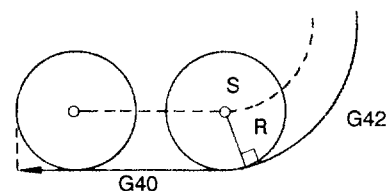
Canceling the Offset Mode at Inside Corner (Arc to Straight-line)
